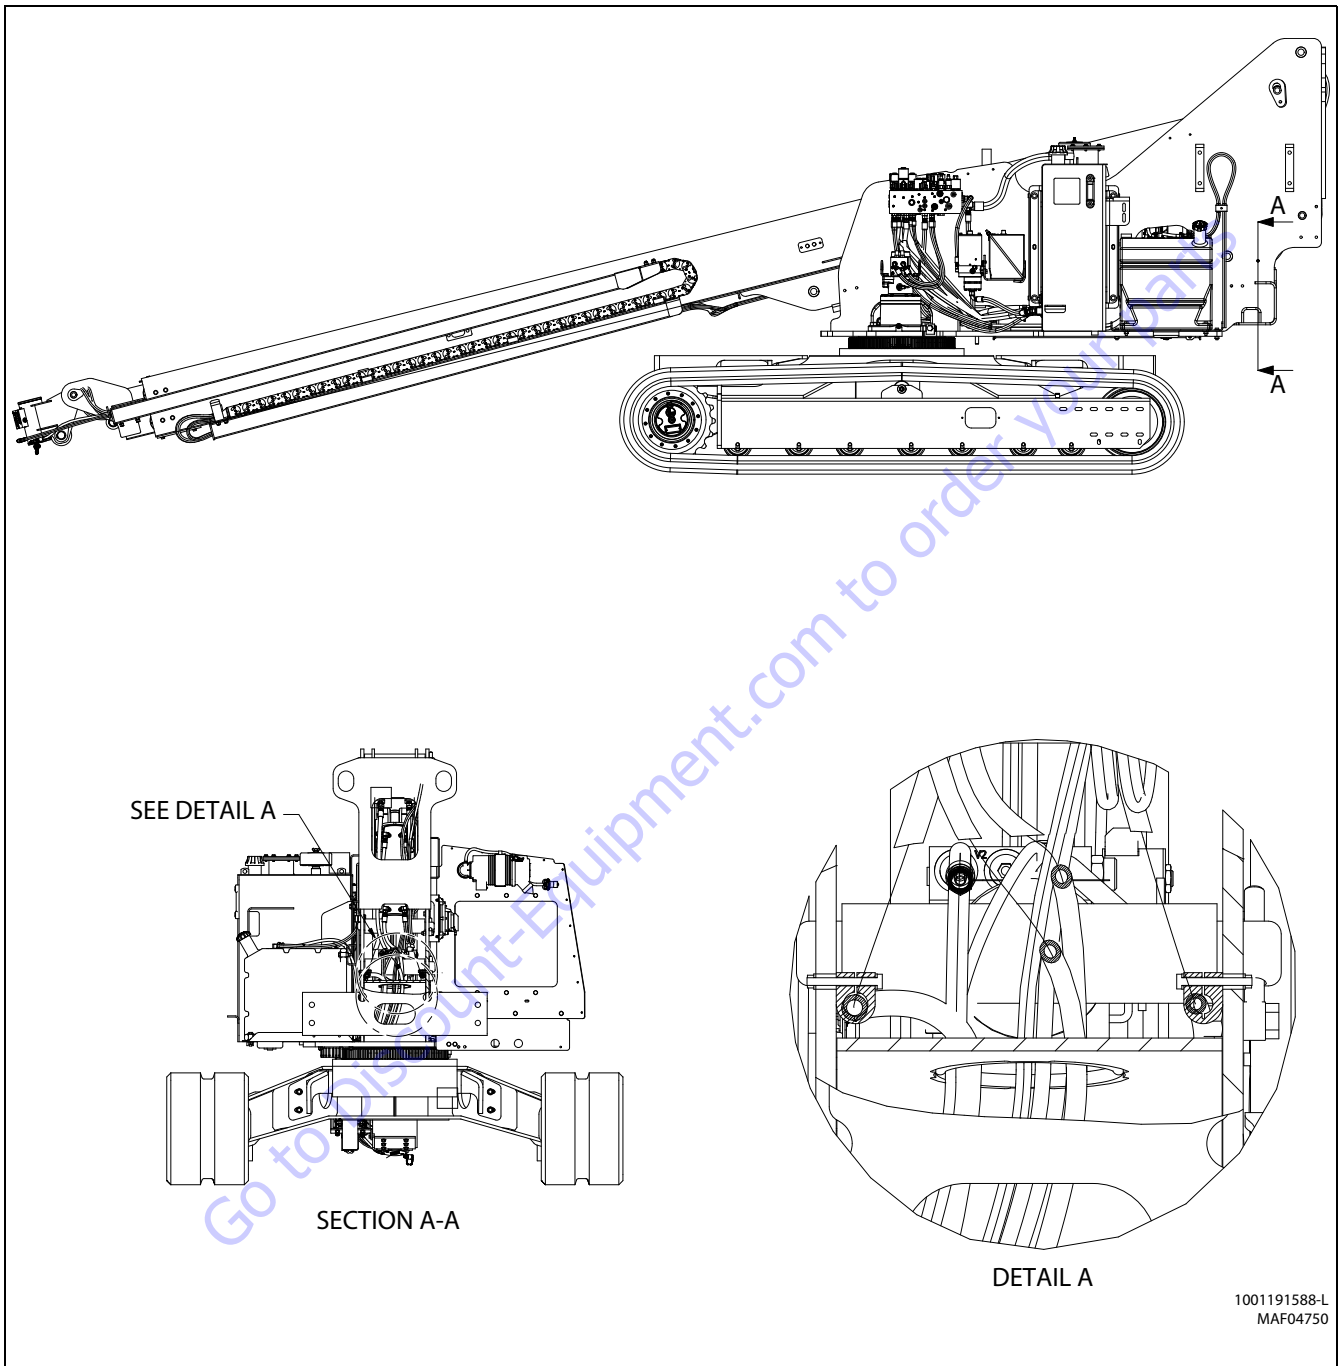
Hydraulic System Installation (400SC) - Sheet 1 of 16
